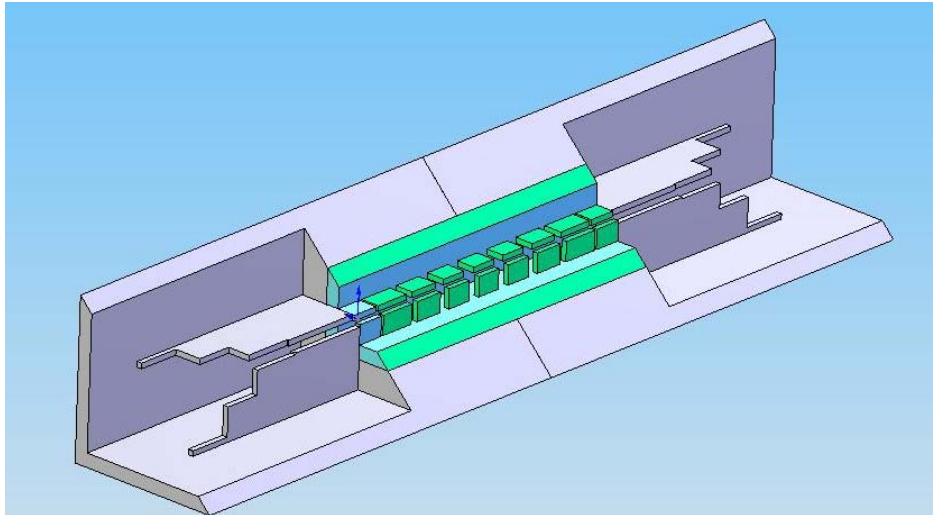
Assembly between the filter and the transformer with cut plane at 45 degree angle.
